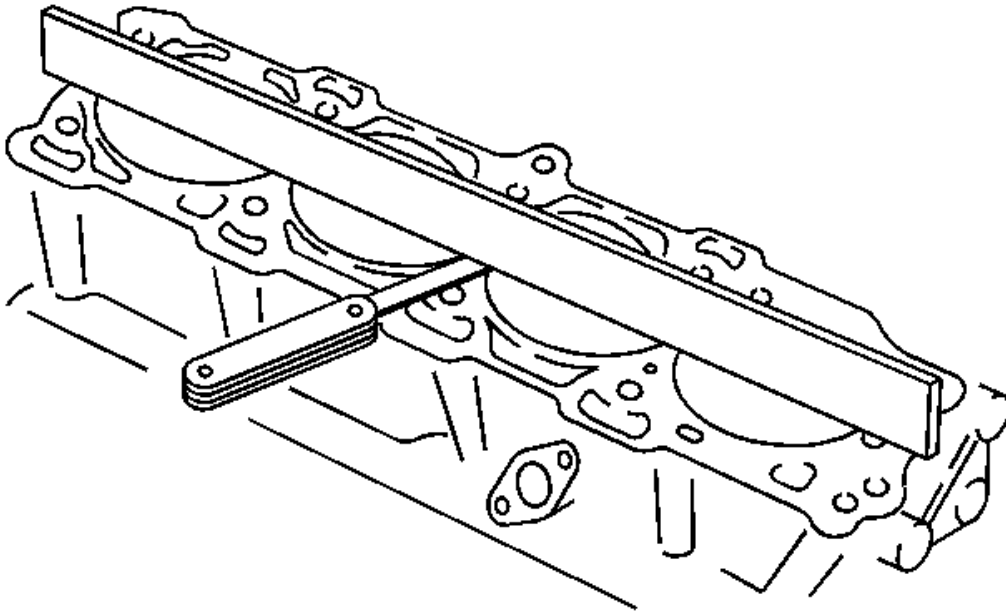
Using Straight Edge & Feeler to Check Deck Surface for Flatness
